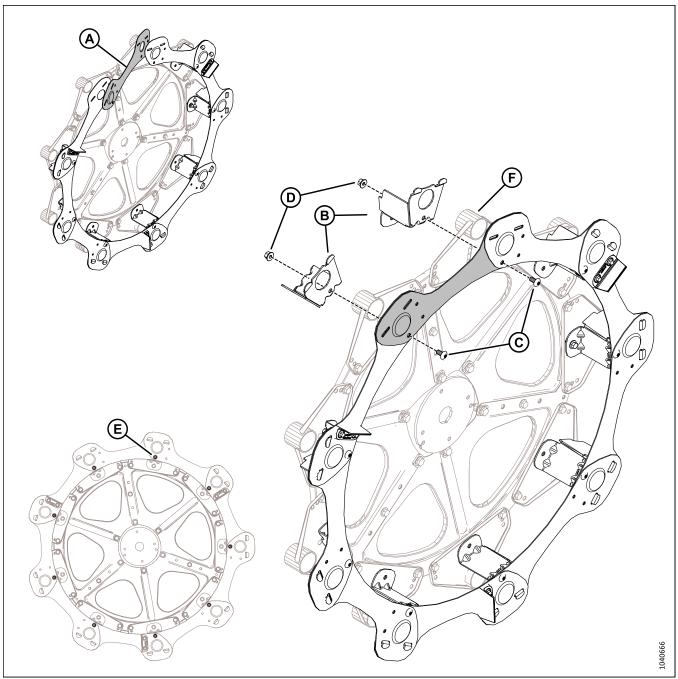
Nine-Bat Reel – Initial Endshield Assembly
